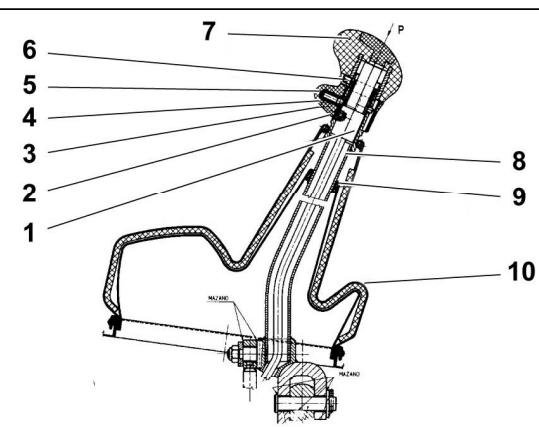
Removal of the gearshift lever c/w shifter rod bracket
